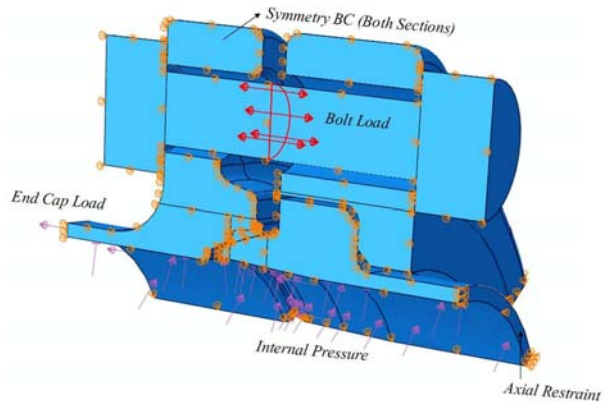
Boundary Conditions and Loading for 3-Bolt Flange Assembly
